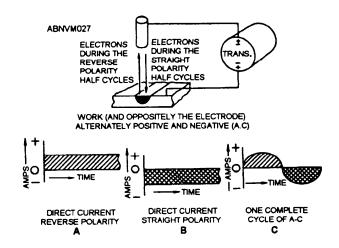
Ac welding as a combination of dc straight and reverse polarity welding.
